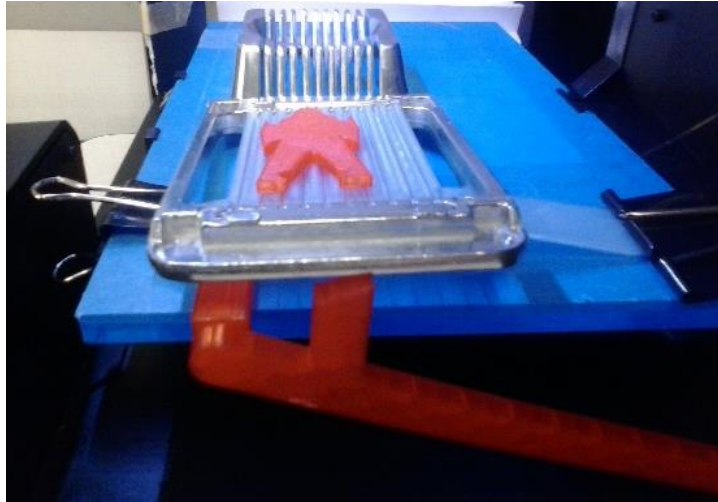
Mechanical part removal system that uses a lever to lift an egg slicer, and thus a part, that rests in the grooves of a 3D printed build platform
